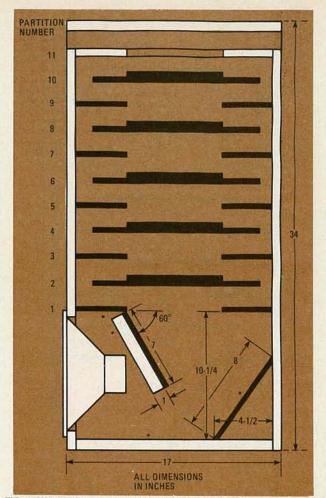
SIMPLIFIED CUTAWAY VIEW of enclosure showing mounting details of first and second behind-the-speaker partitions.
